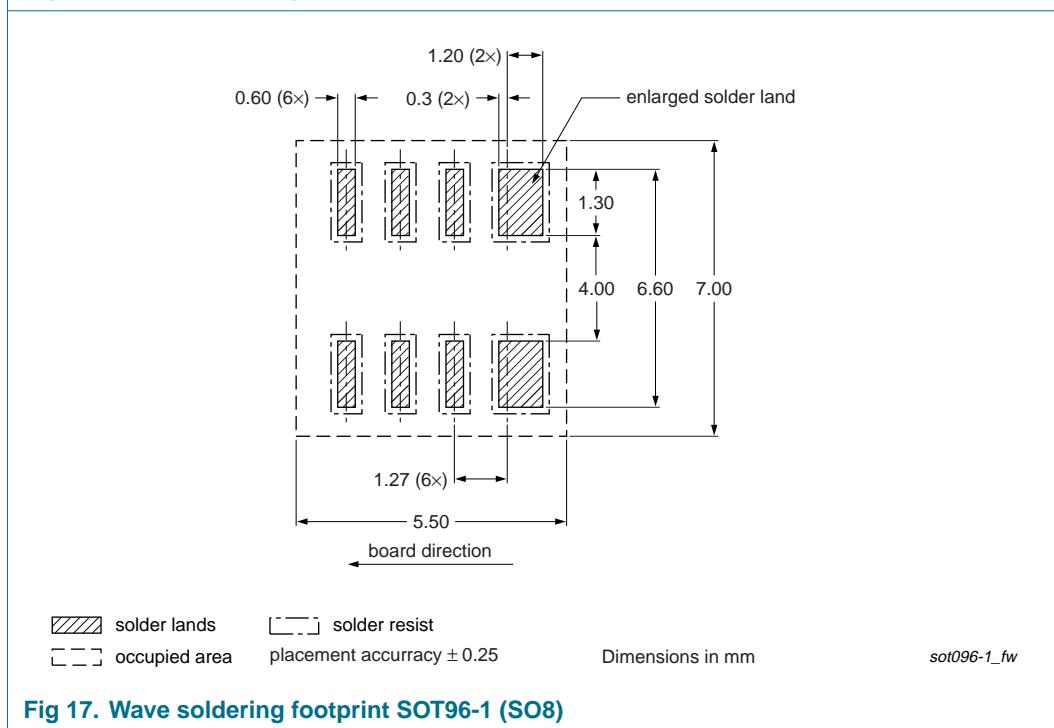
Wave soldering footprint SOT96-1 (SO8)
